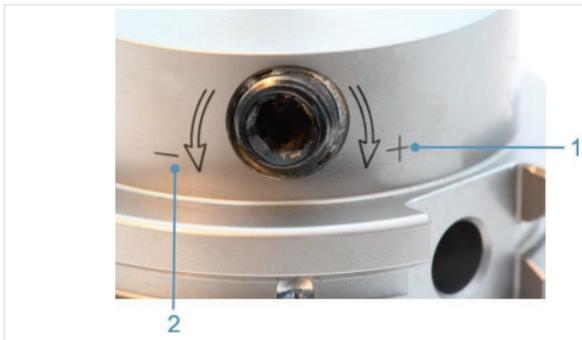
Indication of the direction of rotation for clamping and unclamping the tool
